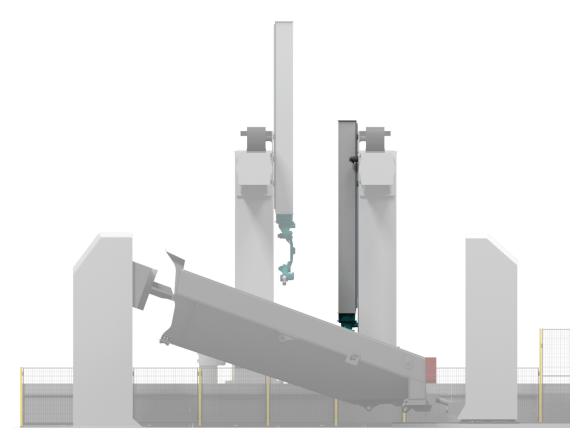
Front view of the robot reach when welding a tilted hauler body, with Z beam (highlighted) fully extended.
